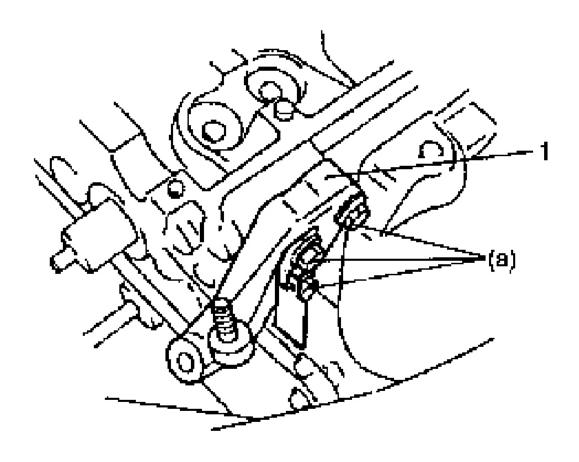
Installing Engine RH Mounting Bracket Courtesy of SUZUKI OF AMERICA CORP.
